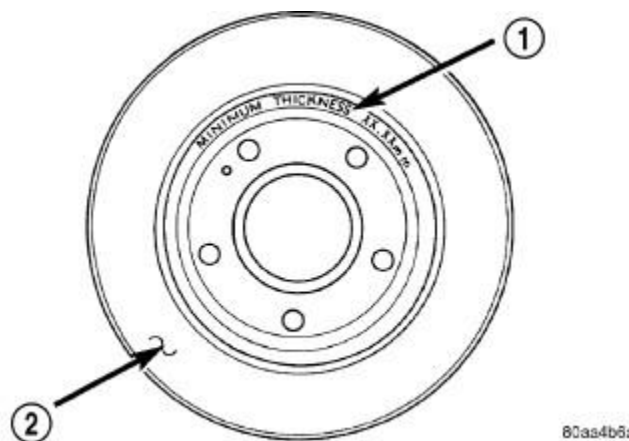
Minimum Brake Rotor Thickness Markings (Typical)
